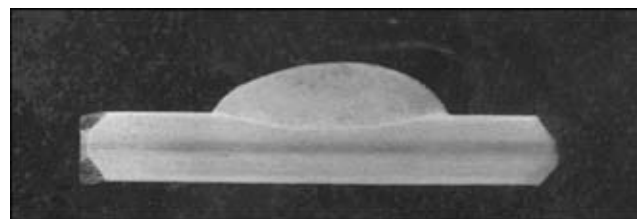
Macrosection of the deposited bead of Br.AZh9-4 bronze
